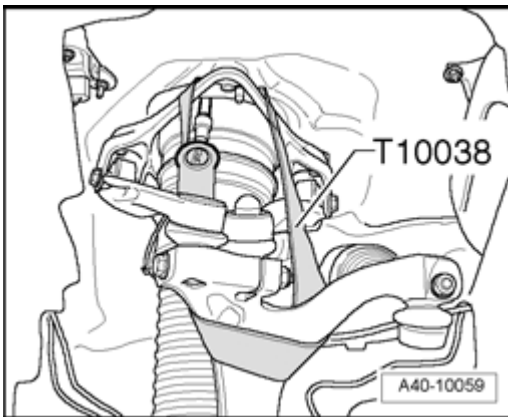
Tying Up Wheel Bearing Housing With Tension Strap T10038
